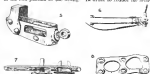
Coupling between upper wing spar and cable. Fig. 6 Tension spar connection. Fig. 7 and 8 Deformed eye plate fittings.
